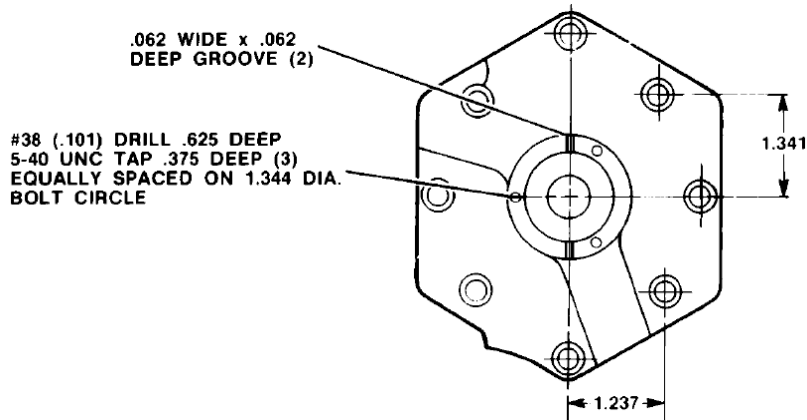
Dimensions for Machining 29 ft-lb Servo Cylinder for Weatherproof Boot
